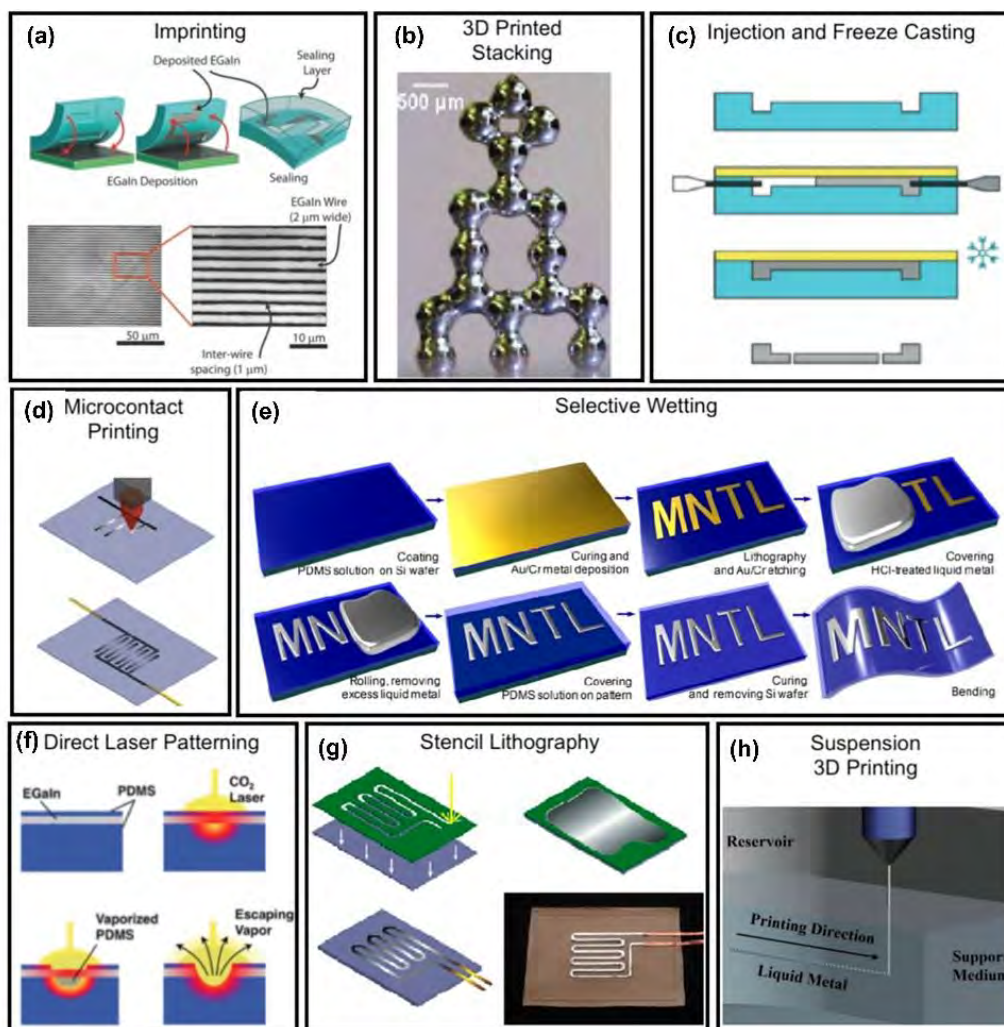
Methods to pattern liquid metal including various techniques including imprinting, 3D printed stacking, injection and freeze casting, microcontact printing, selective wetting, direct laser patterning, stencil lithography, and suspension 3D printing⁴².
